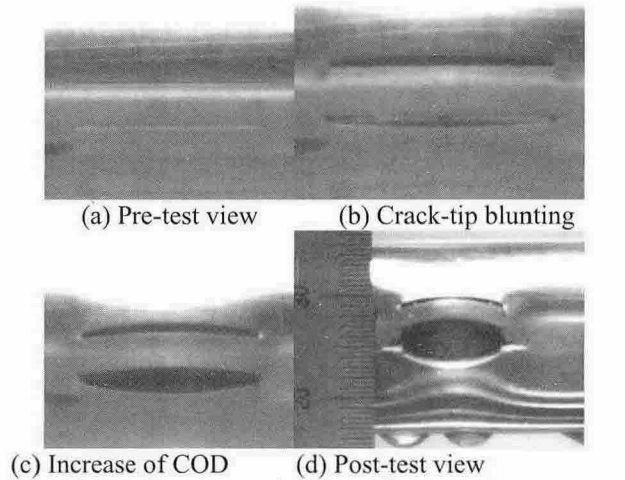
Process of plastic collapse of SG tube containing two parallel through-wall cracks ($2c=10$ mm, $d=2$ mm)
